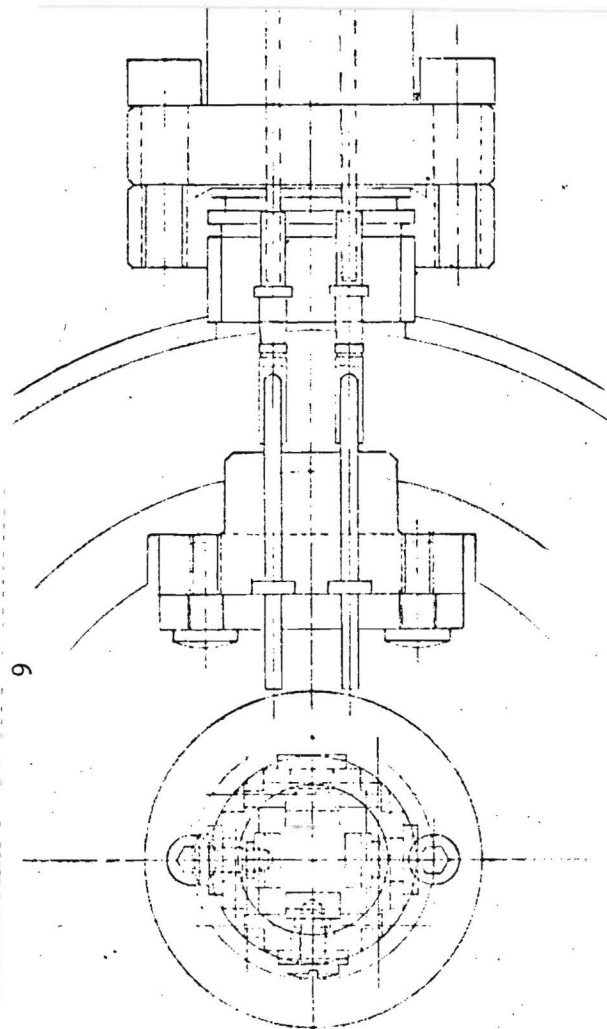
Modified general assembly view of electron gun system showing beam deflecting system in place.
